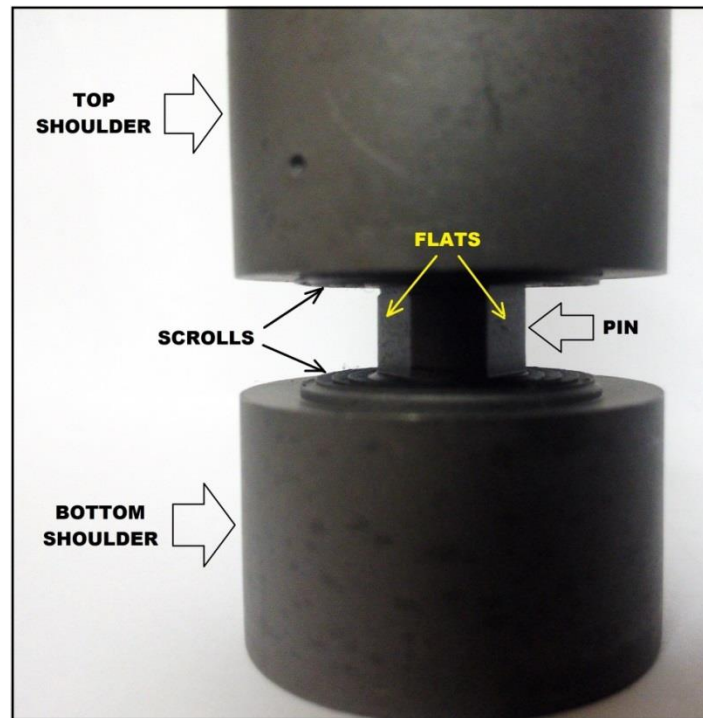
The bobbin-tool used for the Al-Cu welding trial
